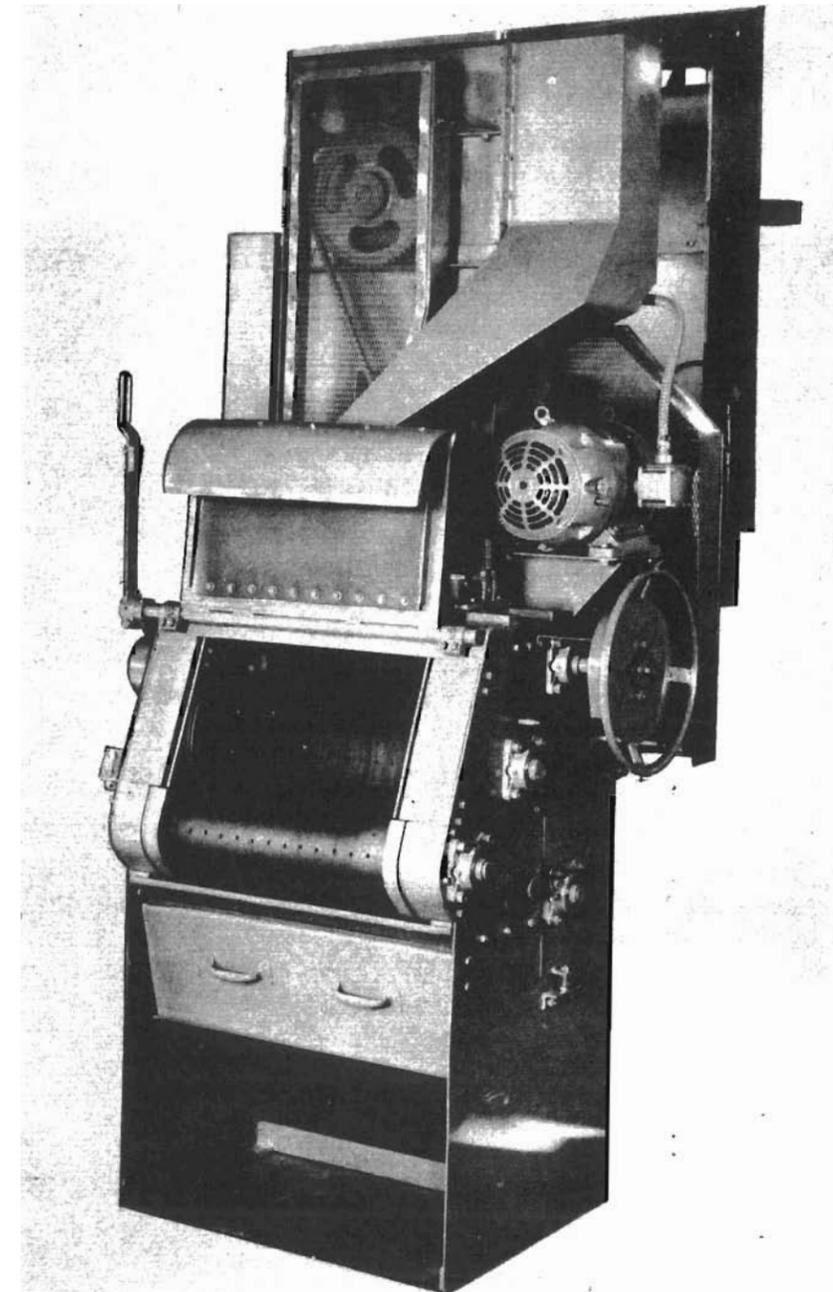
TUMBLE BLAST CLEANING MACHINE
